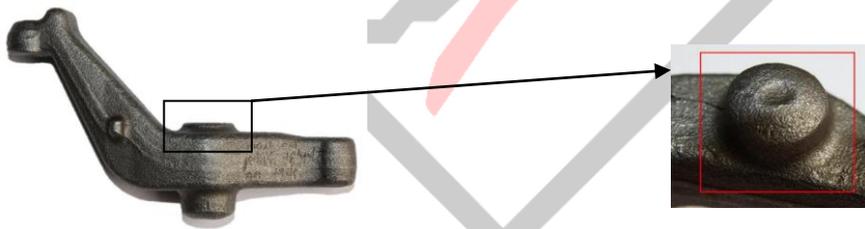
Defects in lever forging: Underfill in lever forging.
